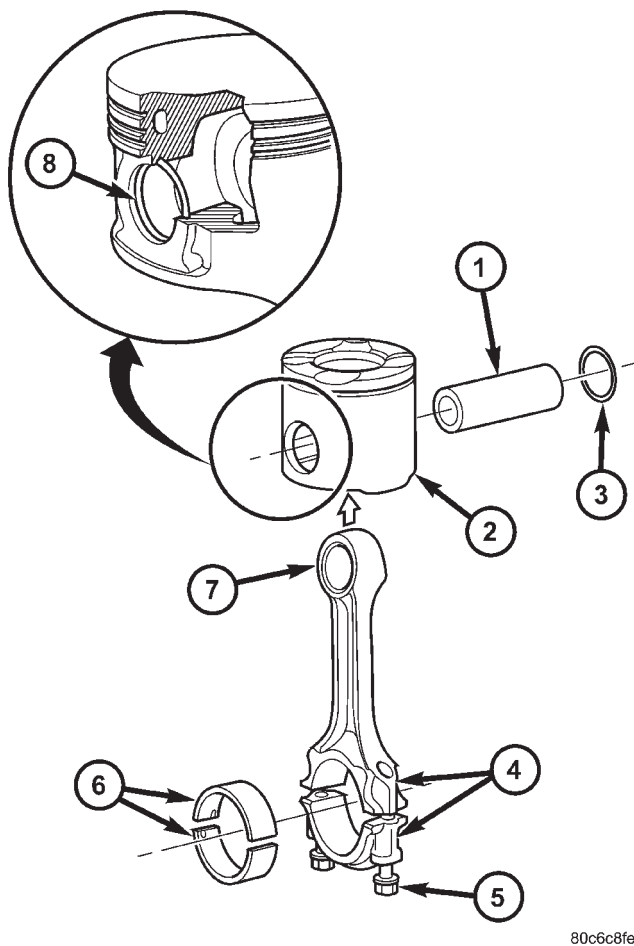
PISTON AND CONNECTING ROD ASSEMBLY
